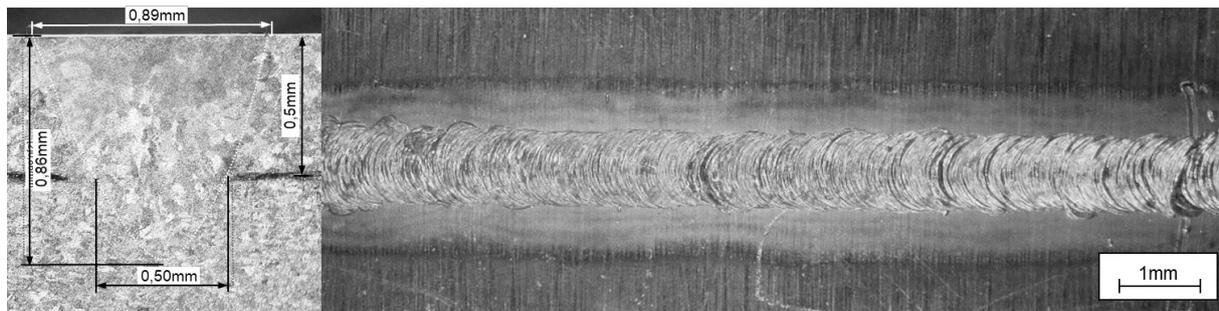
ARM laser, $v = 3$ m/min, cross section and weld surface.
